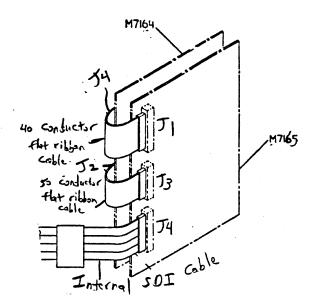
KDA50-Q Intermodule Flat Ribbon Cables
